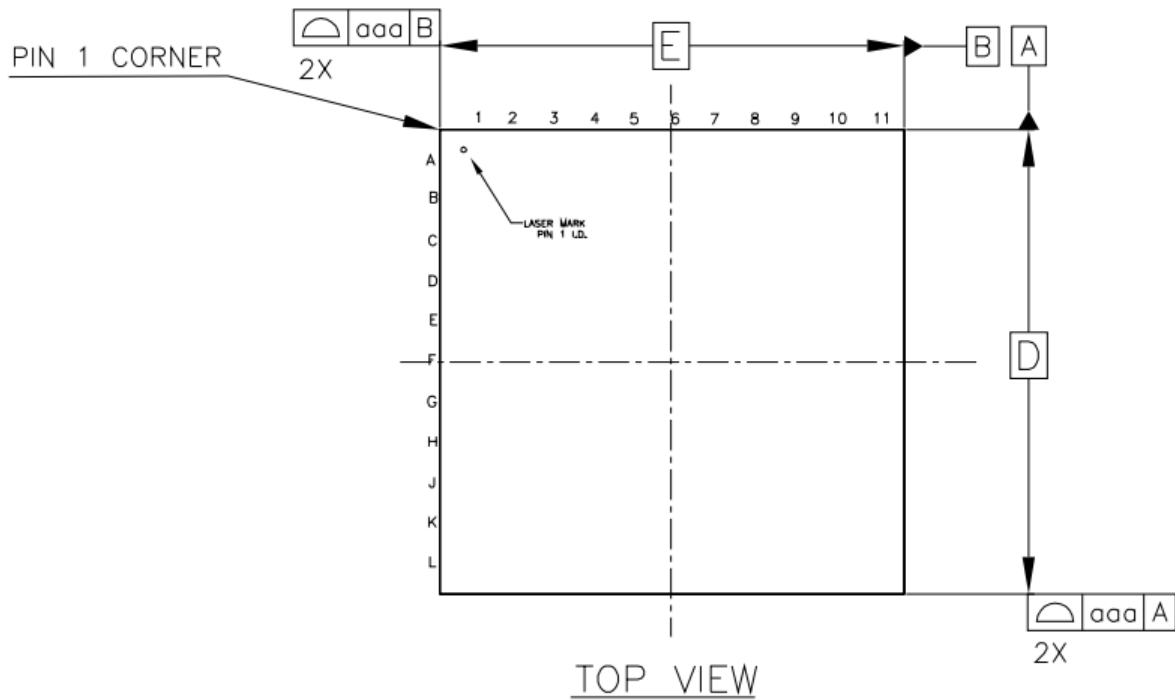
RKNanoD-G LFBGA121 Package Top View
